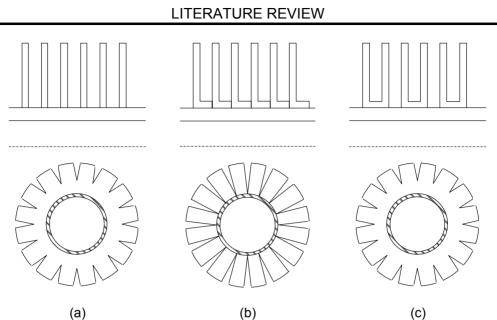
Types of welded fin attachments and the possible degrees of fin serration. (a) I-foot fin, (b) L-foot fin and (c) U-foot fin as reported by Hofmann (2009)
